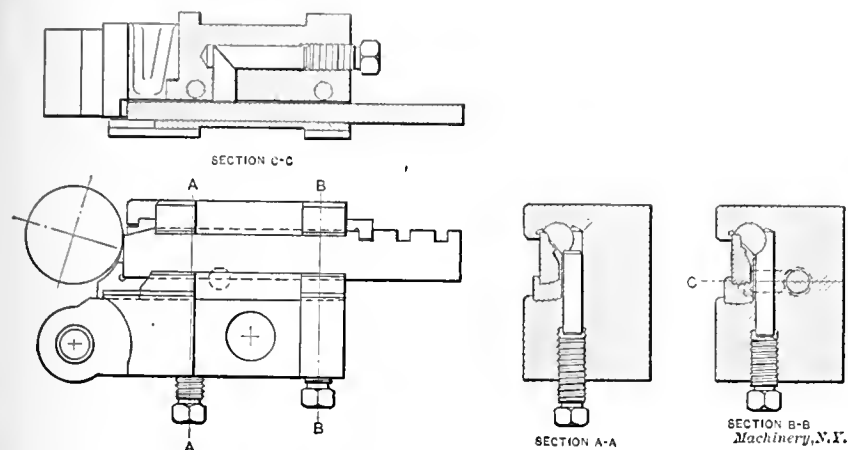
Holder for No-clearance Tool in the Flat Turret Lathe.
